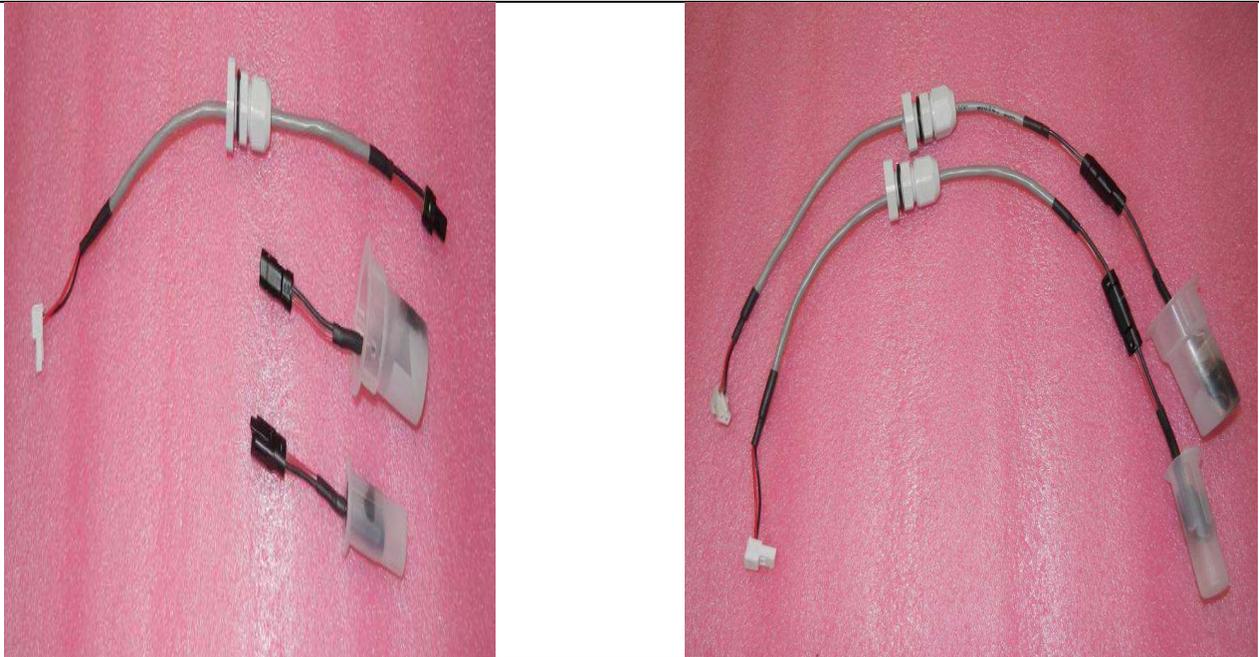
Interchangeable Wiegand sensor assemblies (Part#46-124-10 (common to both assemblies), 46-124-20, 49-124-0) / Assemblages de capteurs Wiegand interchangeables (Pièces n° 46-124-10 (commun aux deux assemblées), 46-124-20, 49-124-0)
